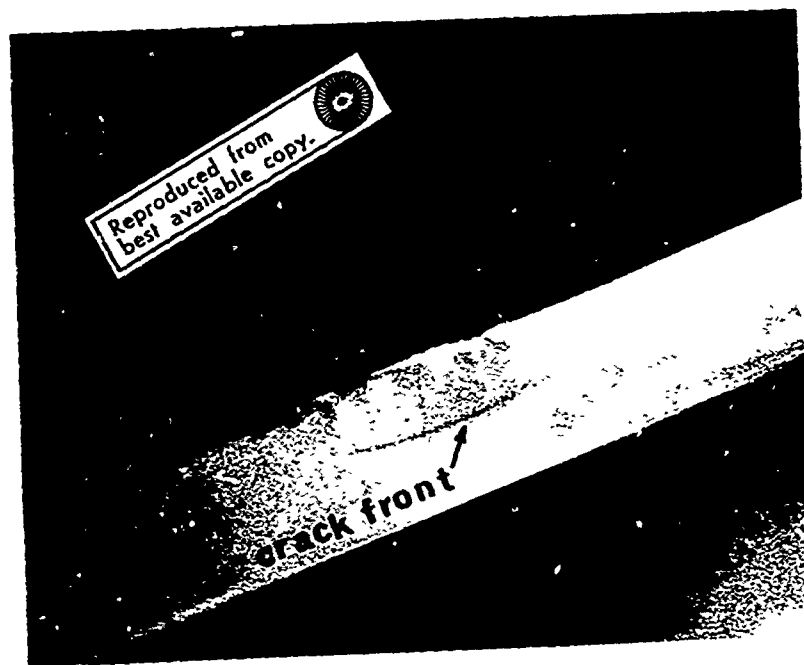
Fracture surface showing ridge that marks the crack front prior to crack propagation
